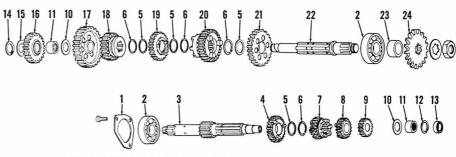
Exploded view of the transmission gears and shafts.
